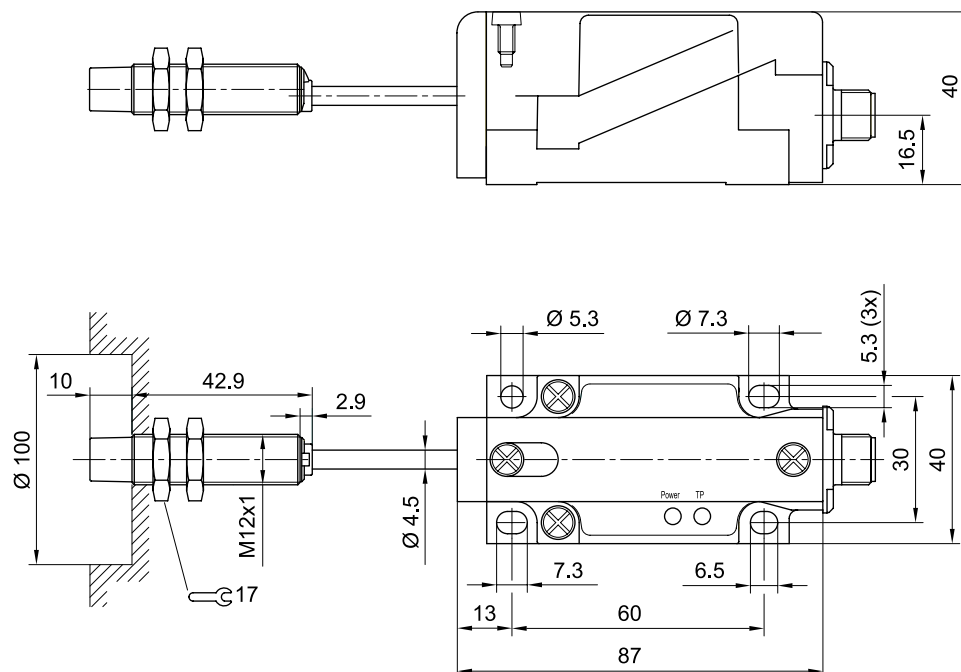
BIS L-400-043-003-02-S115 processor dimensions
